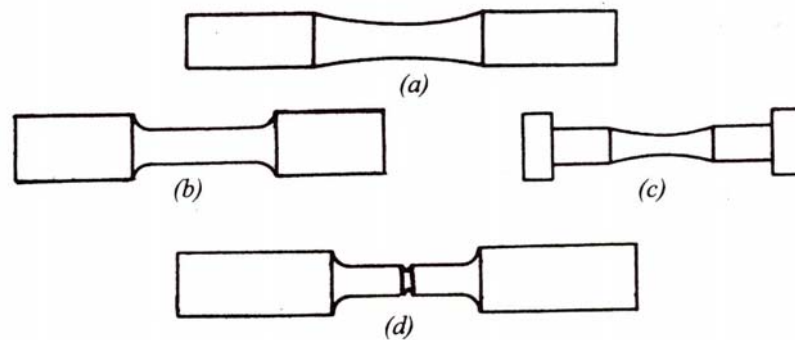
(a) Rotating bending, (b) Axial uniform, (c) Axial hourglass and (d) Axial and bending with circumferential groove²⁵
